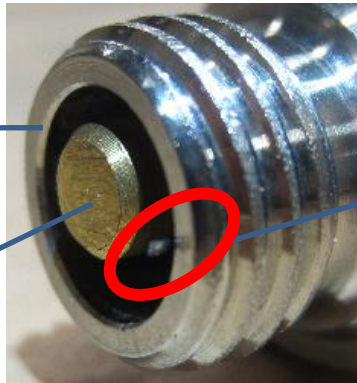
The brass taper pin and trigger wire (circled in red) must be visible in the receiver opening.
